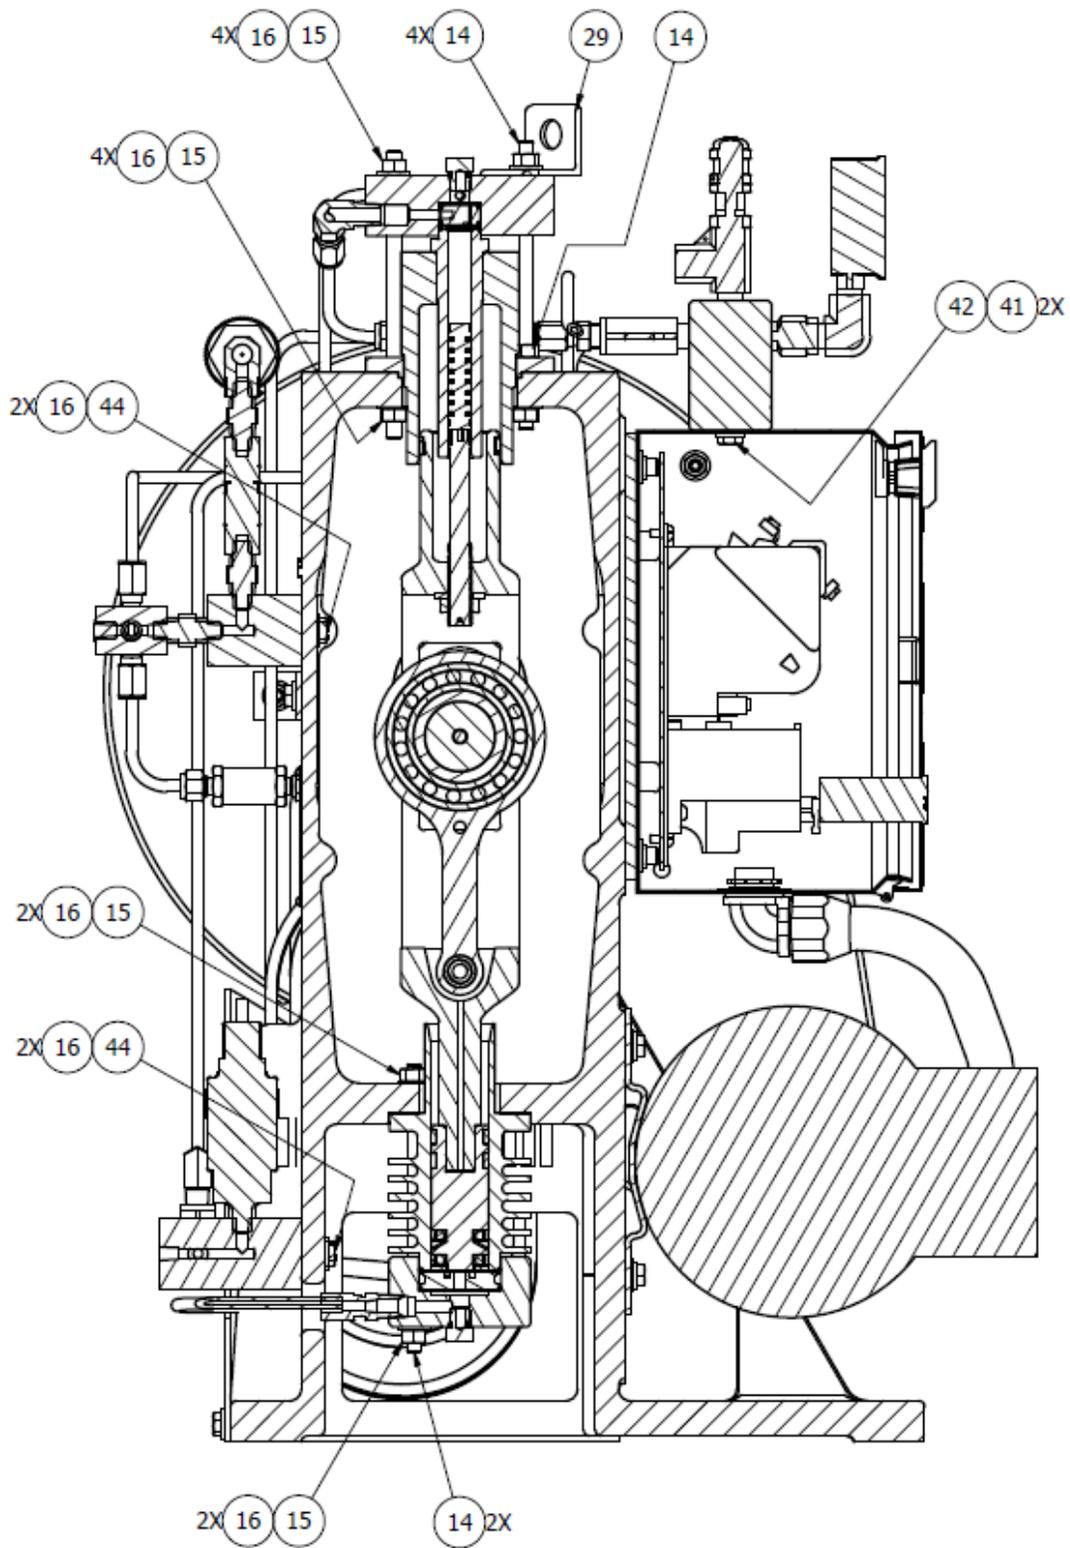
COMPRESSOR CROSS SECTION, FASTENER DETAIL
